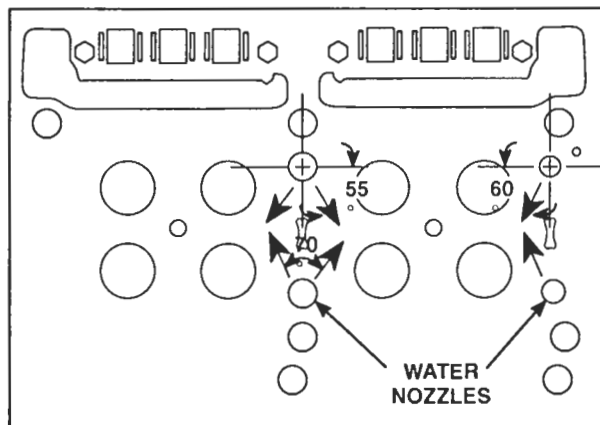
Correct Installation of Water Nozzles in Four-Valve Cylinder Head
